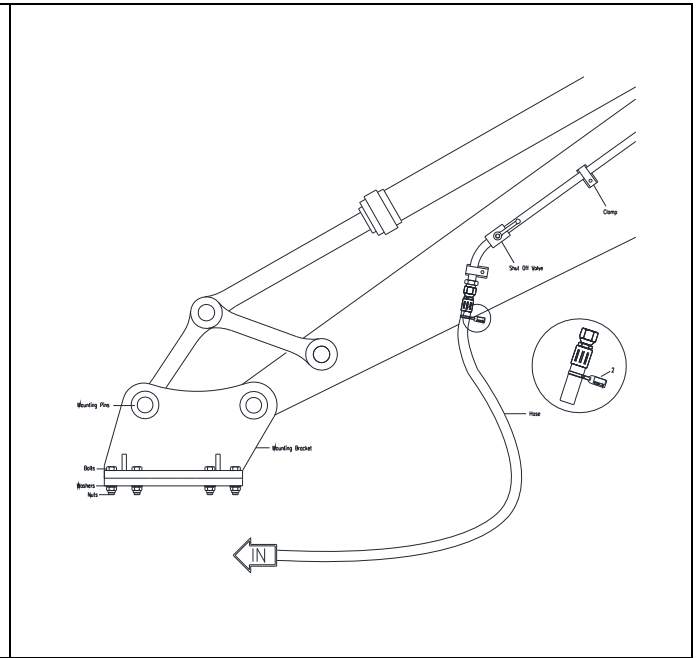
Hydraulic Connections To Excavator - Typical
